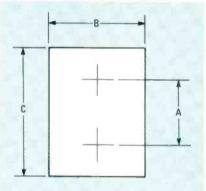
THE AIMING TARGET for the scope/ laser assembly should be made of dull-finish paper or cardboard. Dimension "A" is the measured distance between the laser beam and the optical center of the scope. Dimensions "B" and "C" are whatever you think will be convenient. The aiming cross-marks should be made with a soft pencil or a medium-point marking pen.
